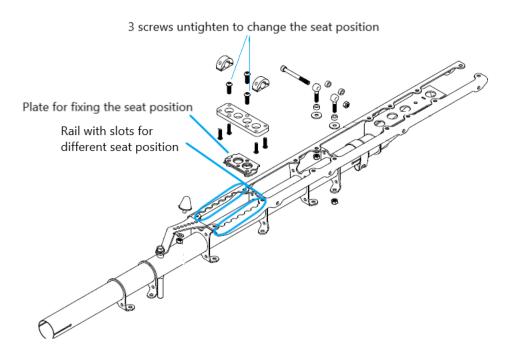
Scheme of Seat adjustment HEAVY LOAD frames
